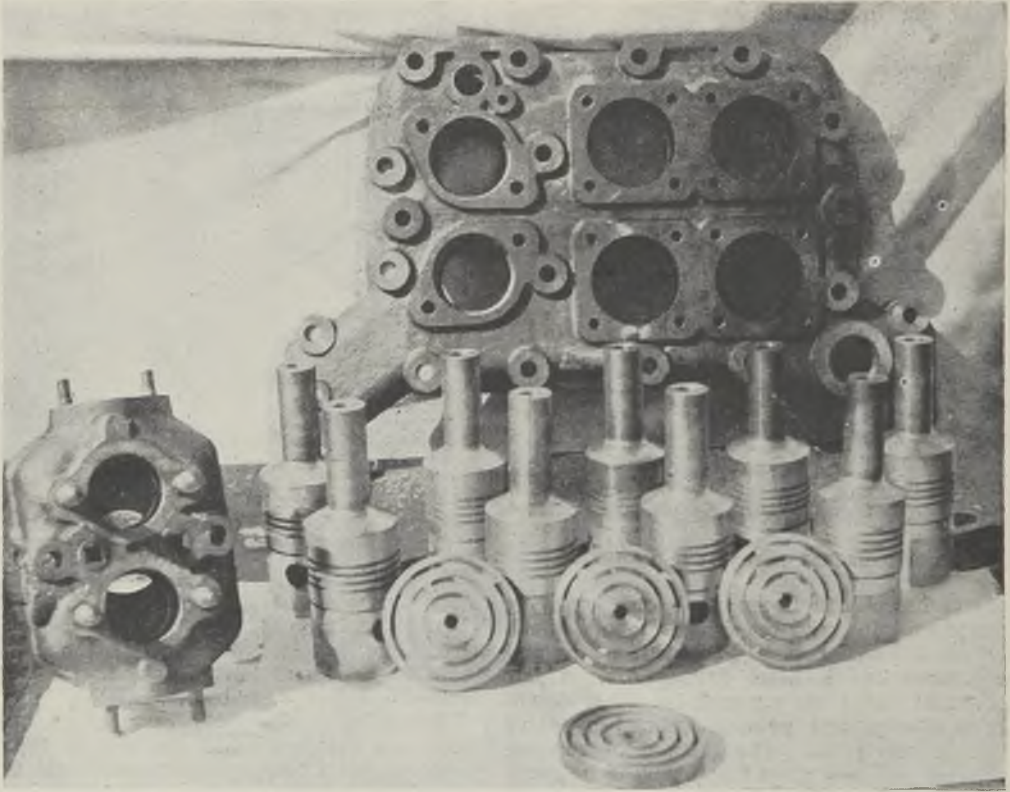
GROUP OF CASTINGS INCLUDING COVERS AND PISTONS.
